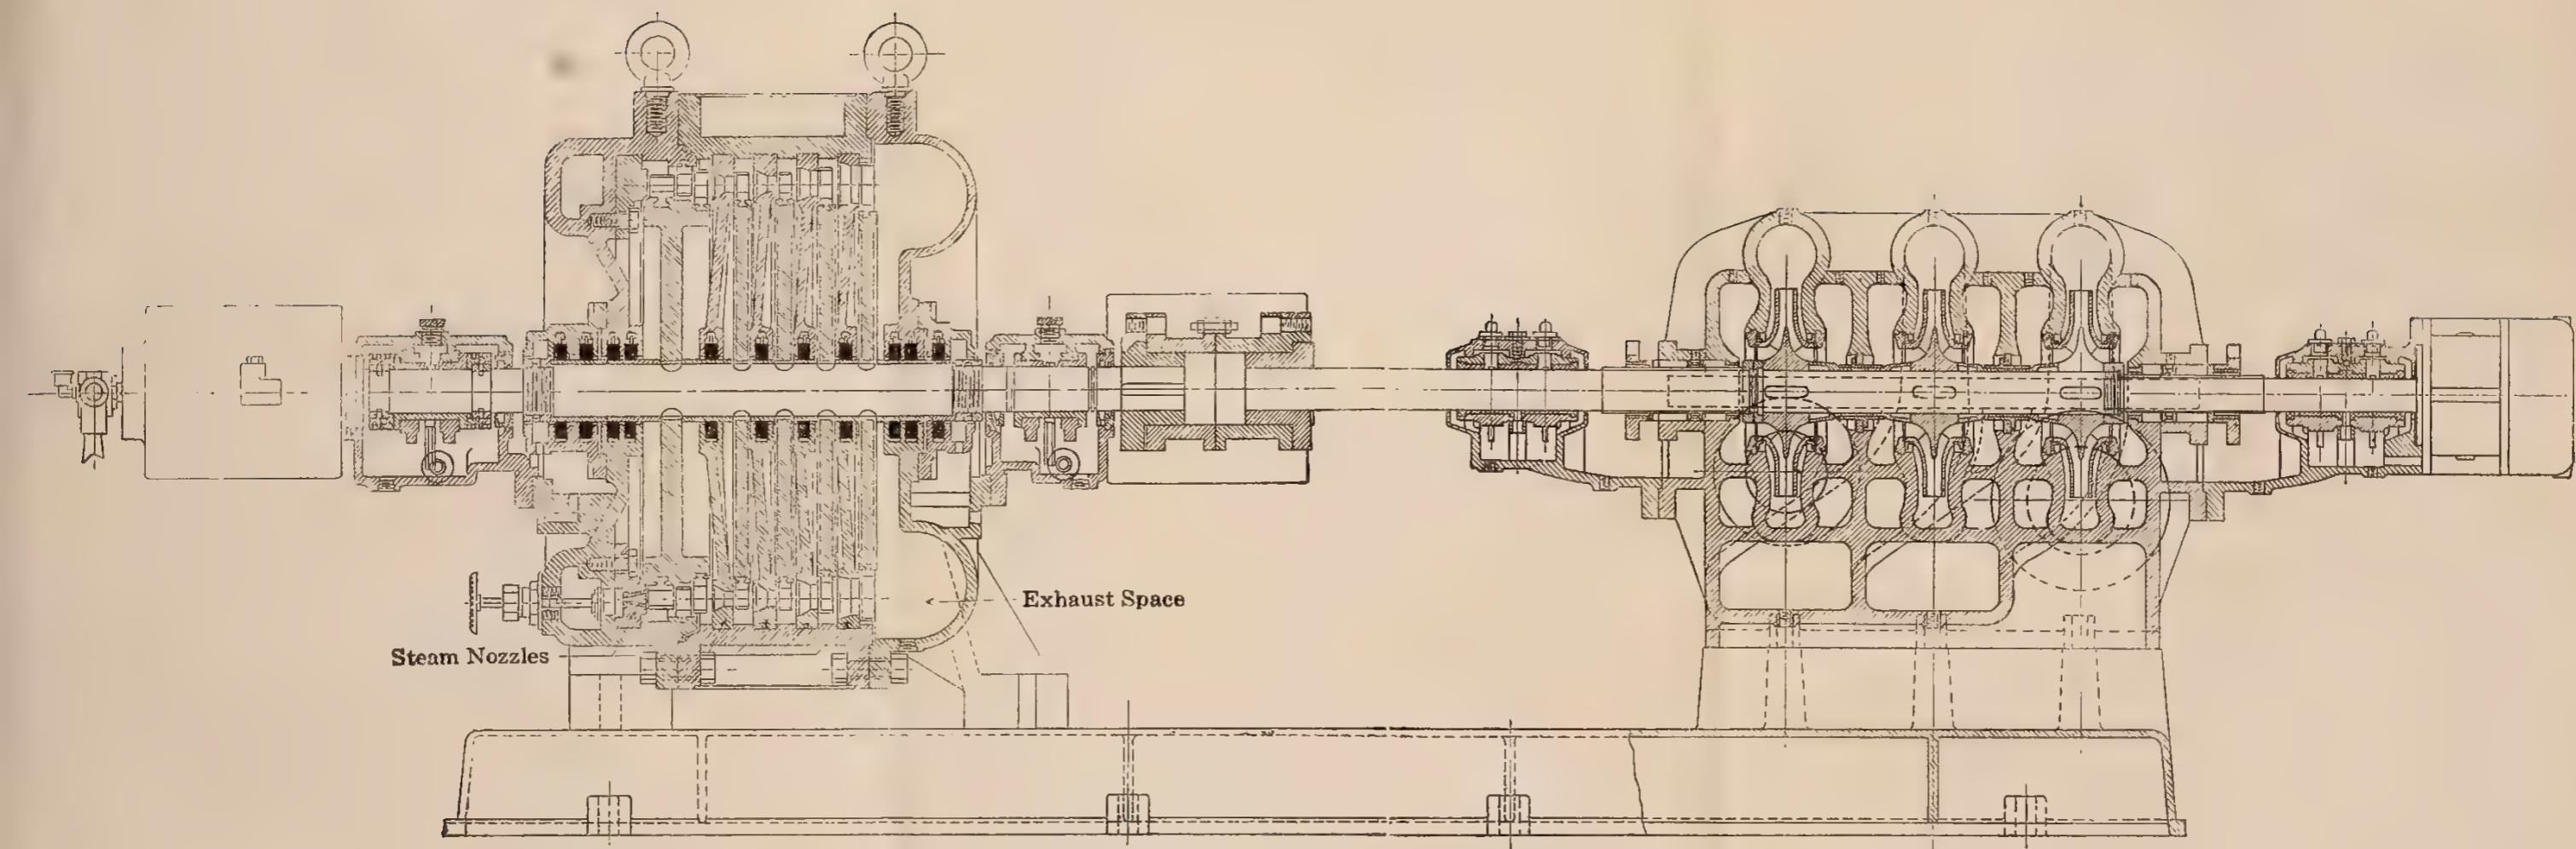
Steam Turbine-driven Centrifugal Boiler Feed Pump.
